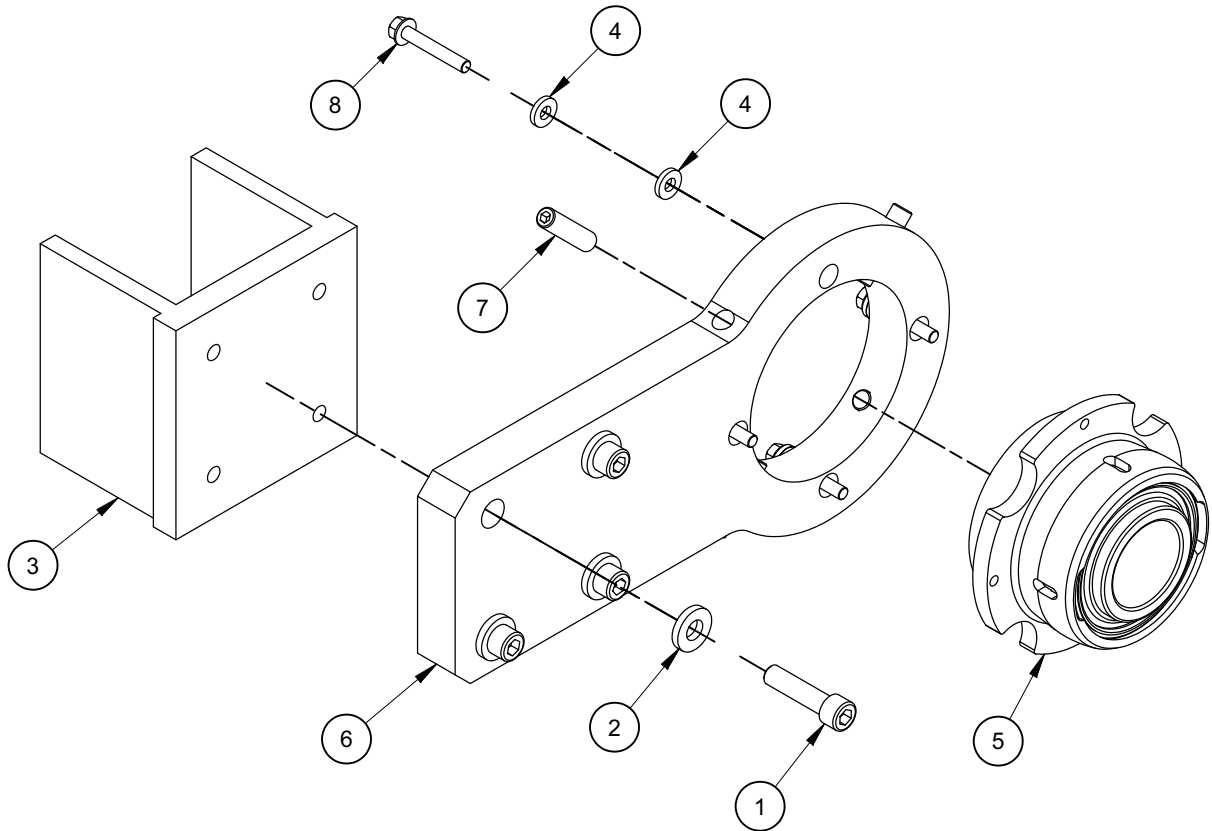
HYDRAULIC MOTOR ASSEMBLY (P/N 39848)
